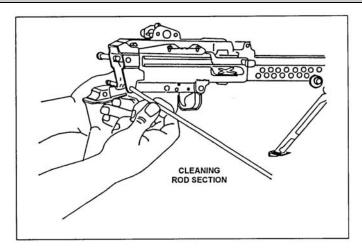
Removal of the buttstock and buffer assembly
